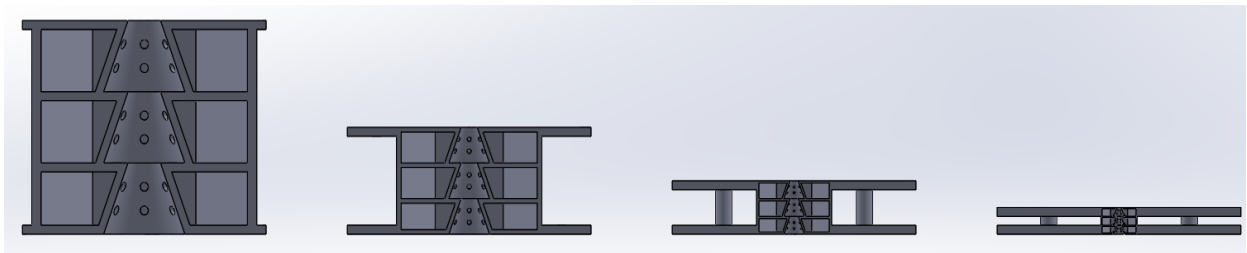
SISO - Downsizing Prototypes - Cross-Section CAD View
